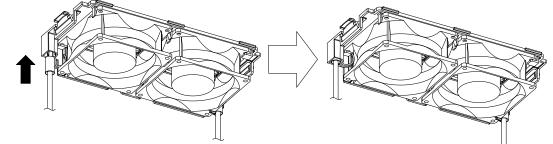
Unplug the Protective Tube and Fan Connector: 2A0075 to 2A0114 and 4A0052 to 4A0096
